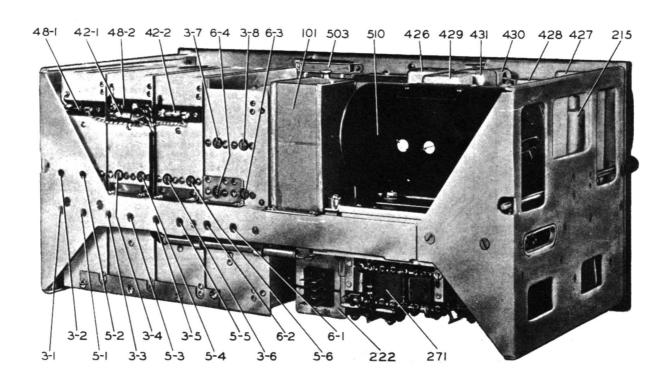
RADIO RECEIVER BC-348-B: REAR VIEW OF CHASSIS
